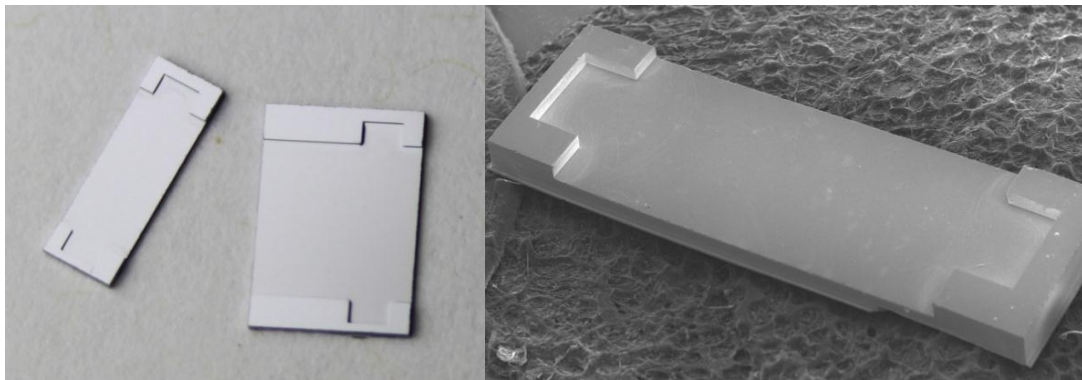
Left: 2.4 and 5mm 3-D stacking carrier wafers, Right: SEM picture of the 2.4mm 3-D stacker
